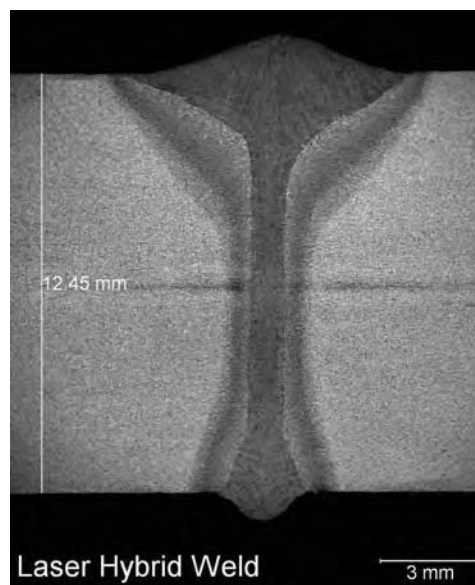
Cross section of hybrid laser arc welding on a carbon steel square butt joint. Courtesy of Edison Welding Institute
